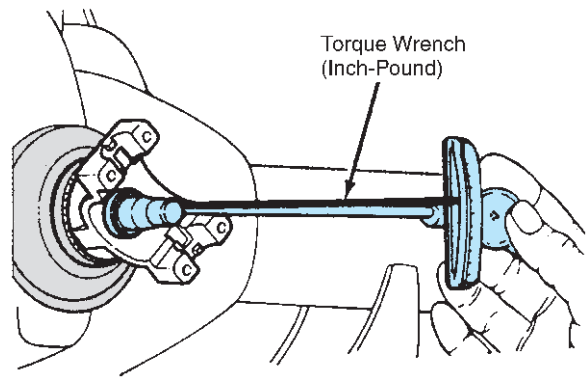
Drive pinion and axle preload is measured by disconnecting the driveshaft and using a torque wrench to measure the torque required to rotate the pinion shaft. (Courtesy of Ford Motor Company)
